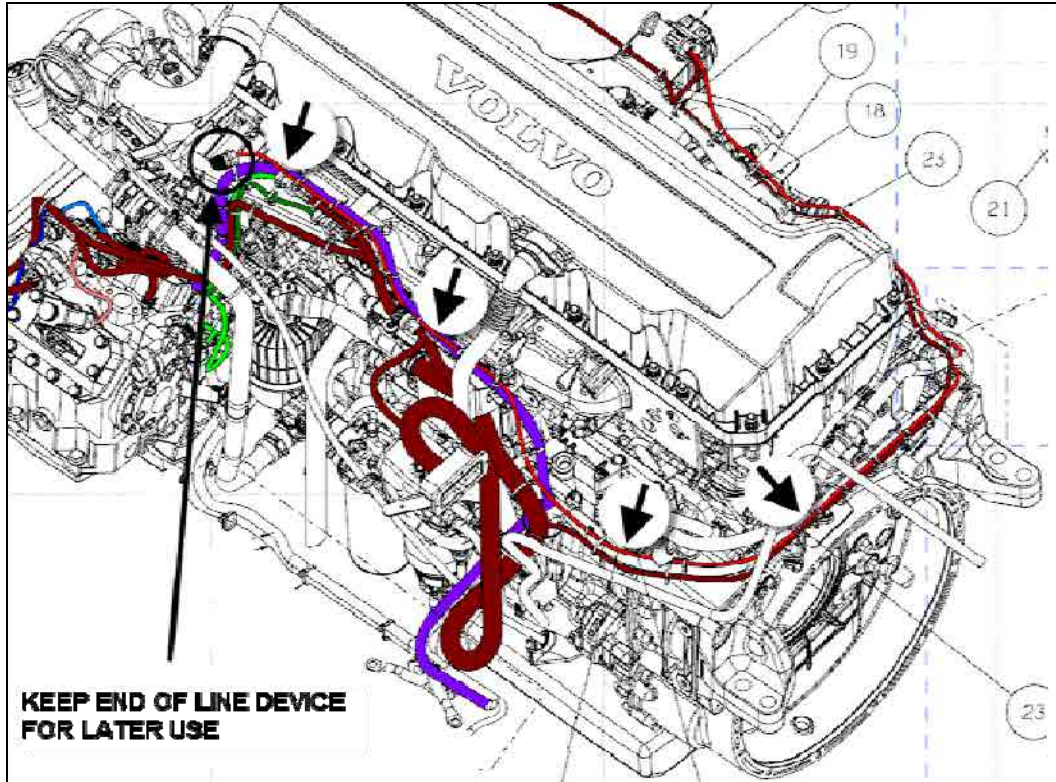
ENGINE COLD SIDE - REMOVE LTD, KEEP THE END OF LINE DEVICE (EOL) FOR REUSE
